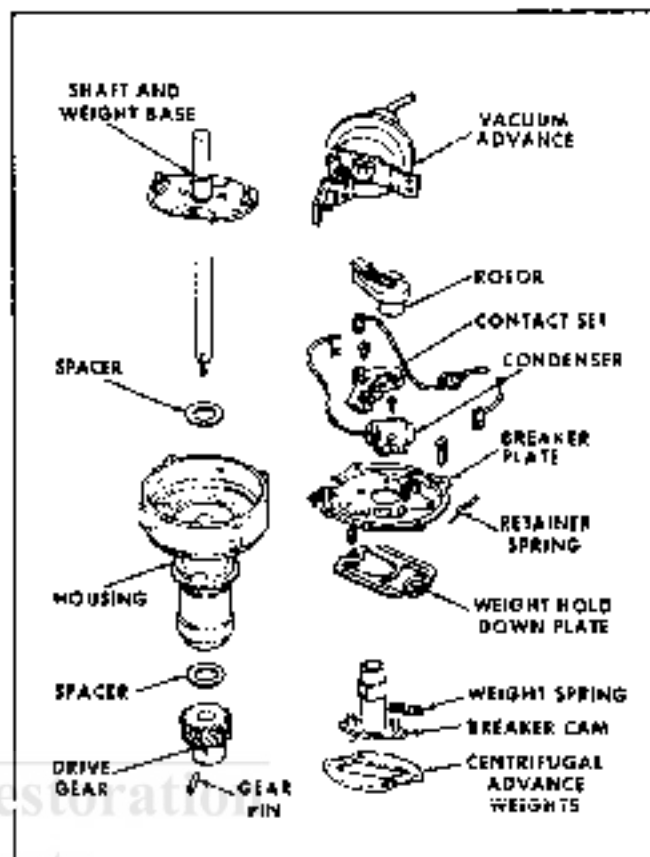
E-22 Exploded View of 6-Cylinder Distributor
